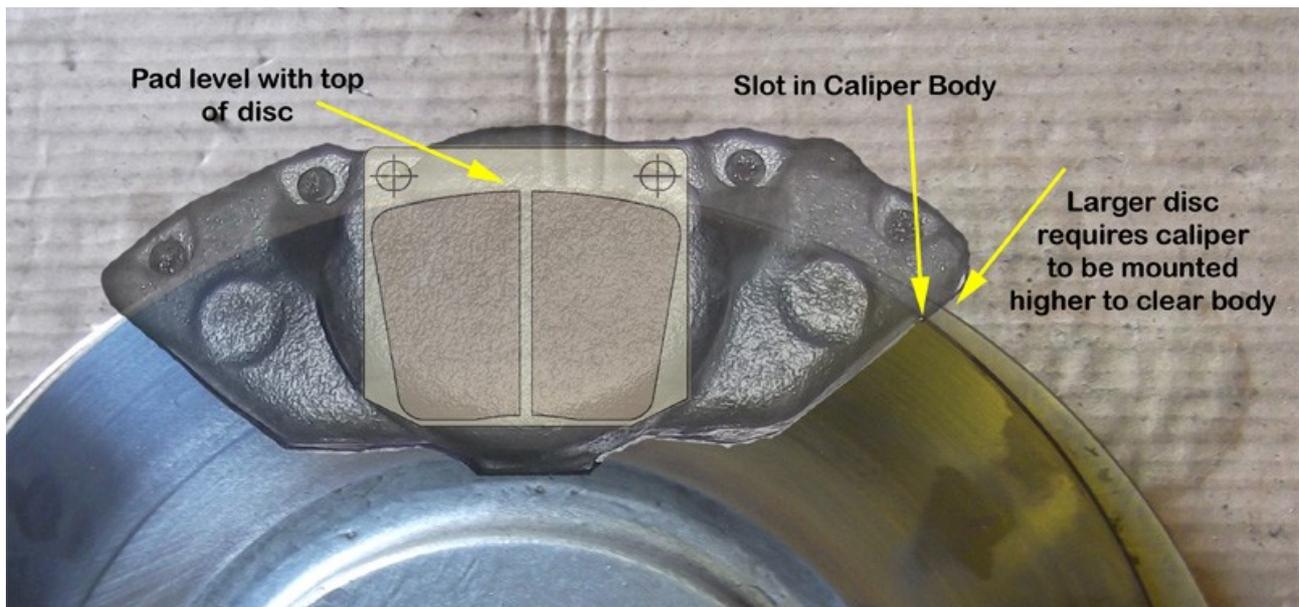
232mm, 266mm disc with type 14 caliper superimposed
